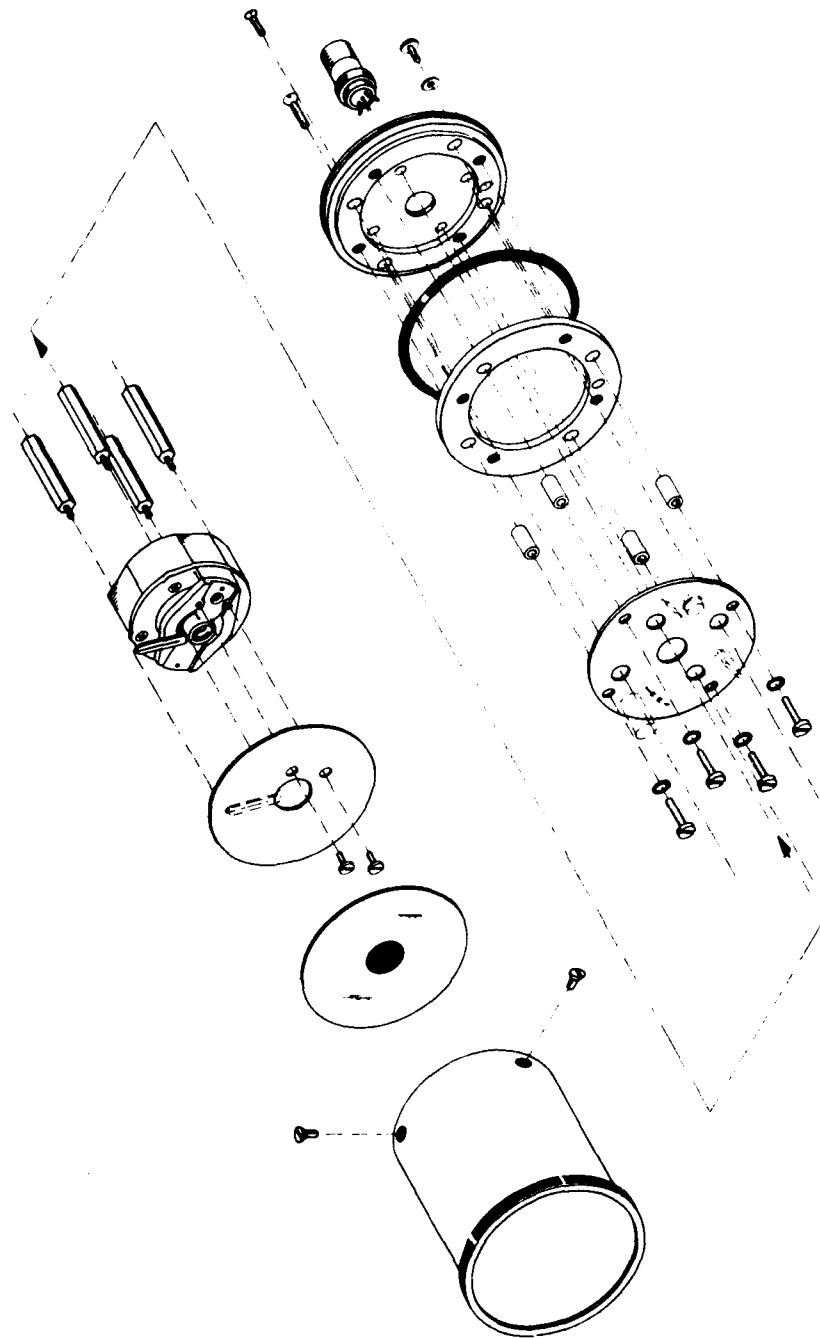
EXPLODED VIEW OF TORQUEMETER PN 73-30-1
